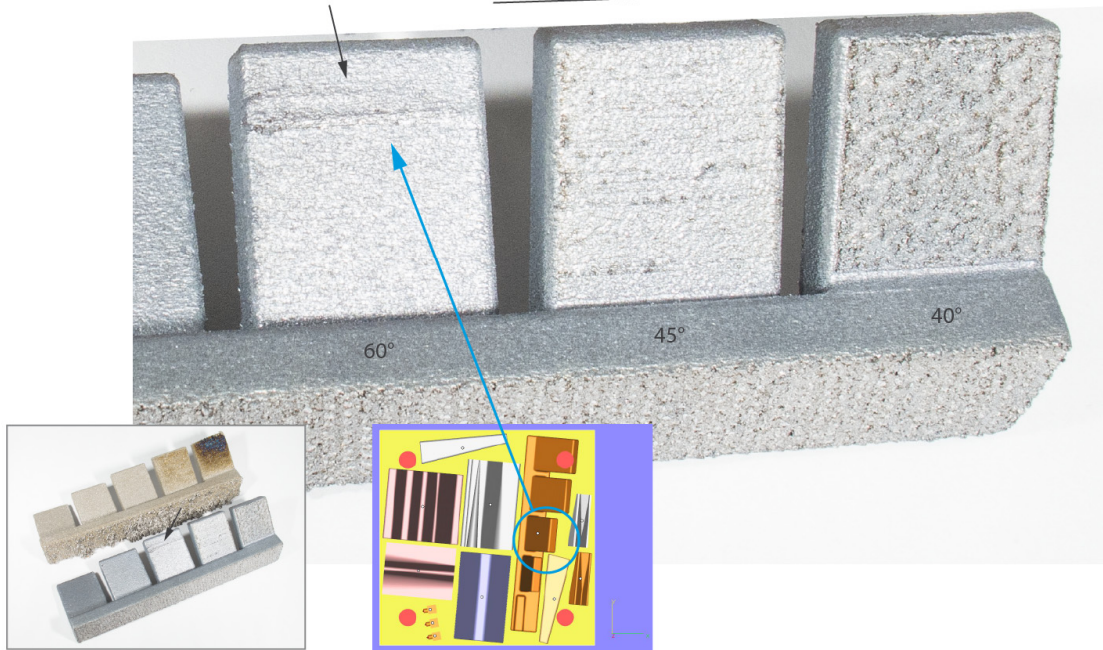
Remarks on the bottom surfaces of AlSi12 inclined plates.
